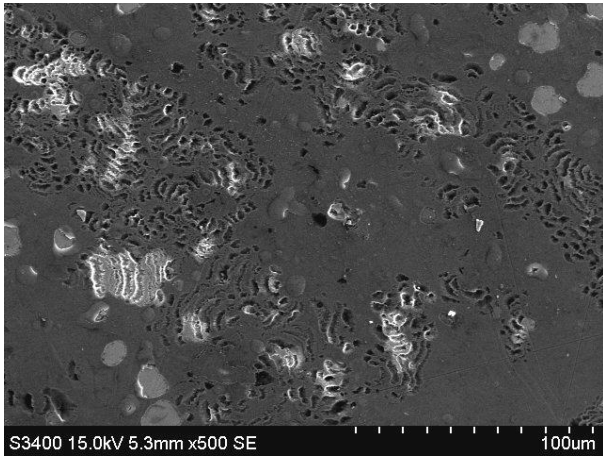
Pitting-like attacks at 2.0 mm from the fusion line in Weld Sample 3.
